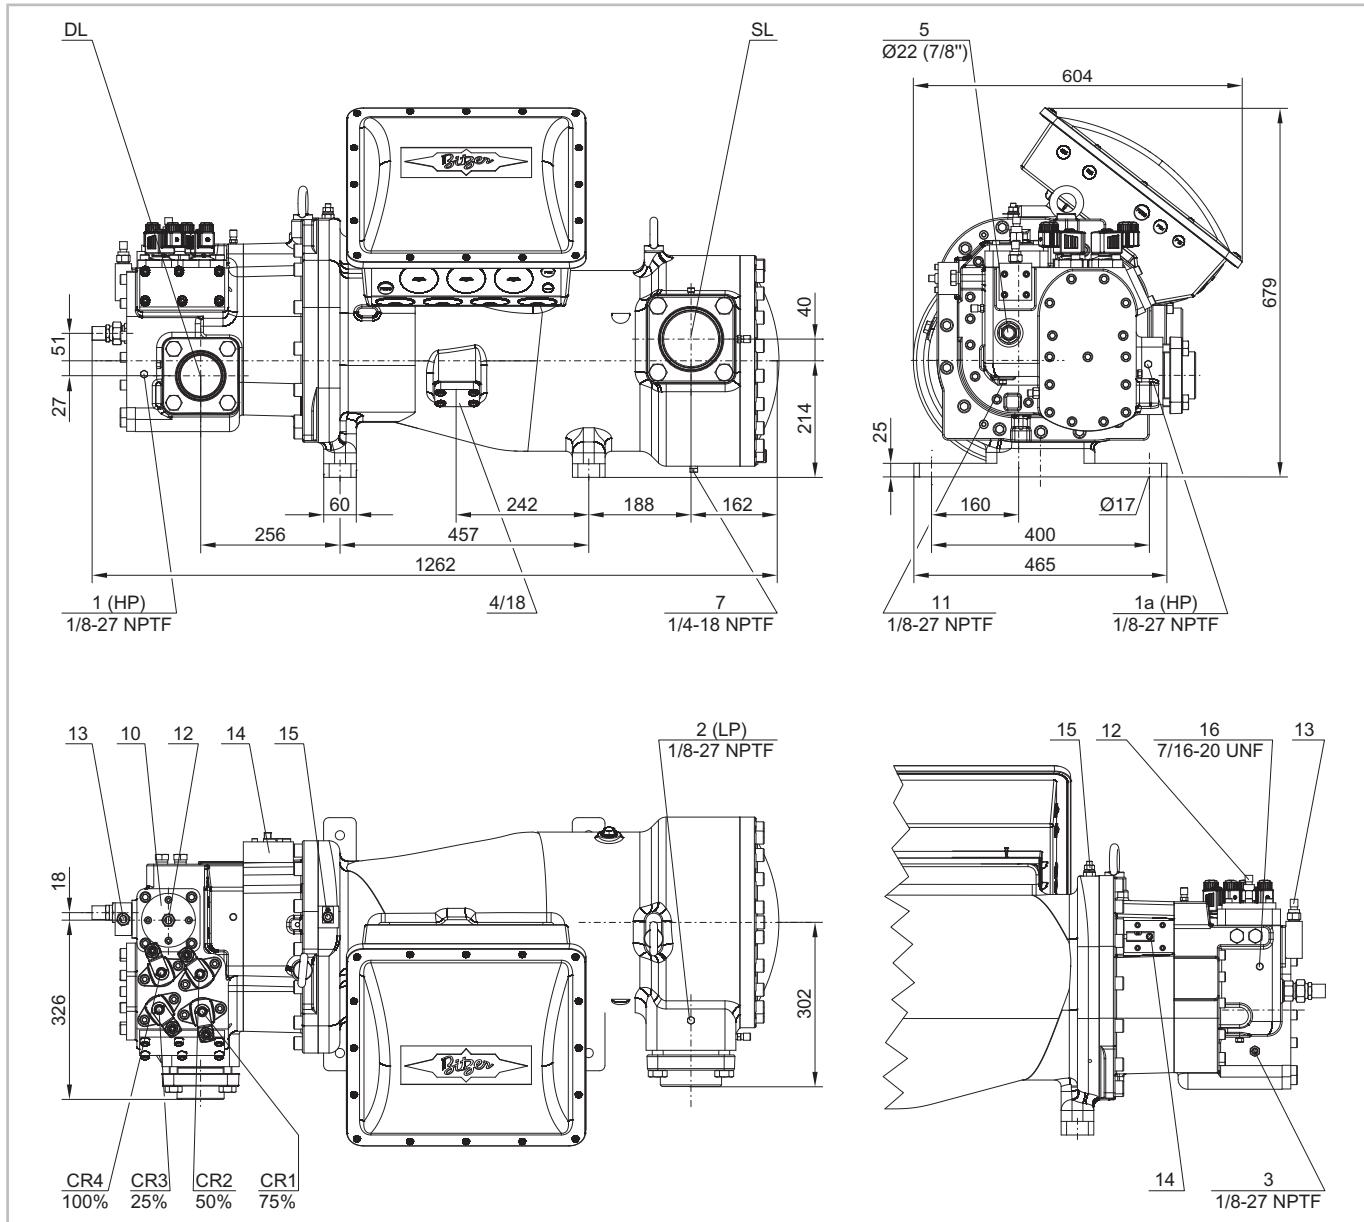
Dimensional drawing HS.8581 and HS.8591
